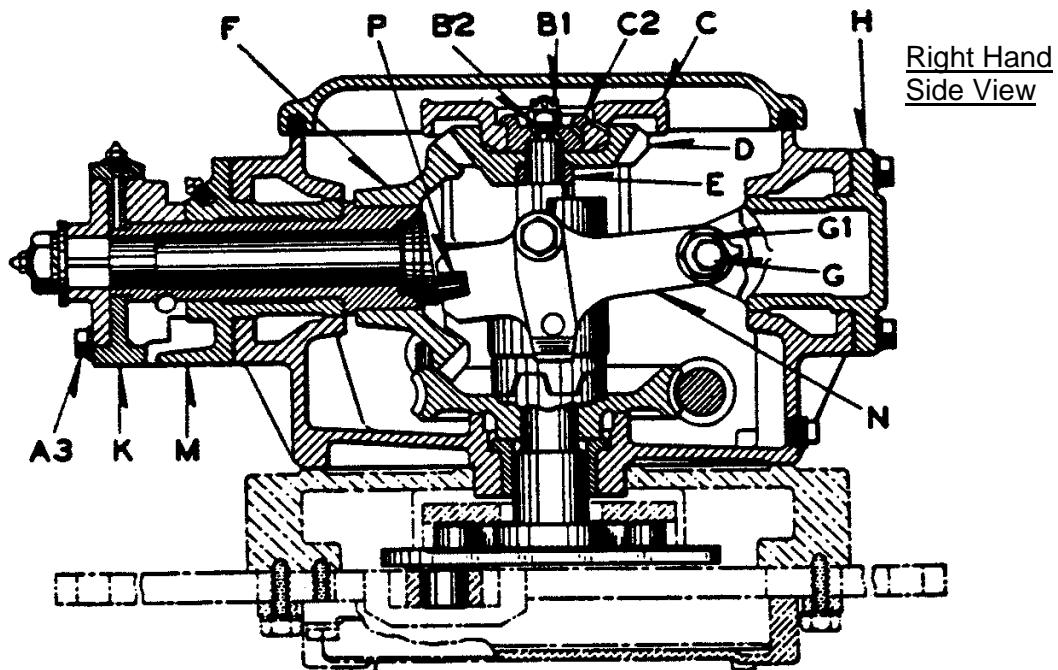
Sectional View of M-23A Gearbox, Looking from Motor End
